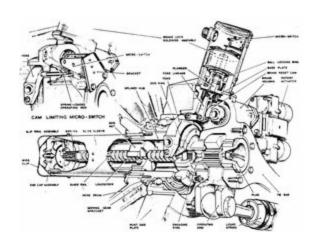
Mk 17 hose-drum unit, brake mechanism
